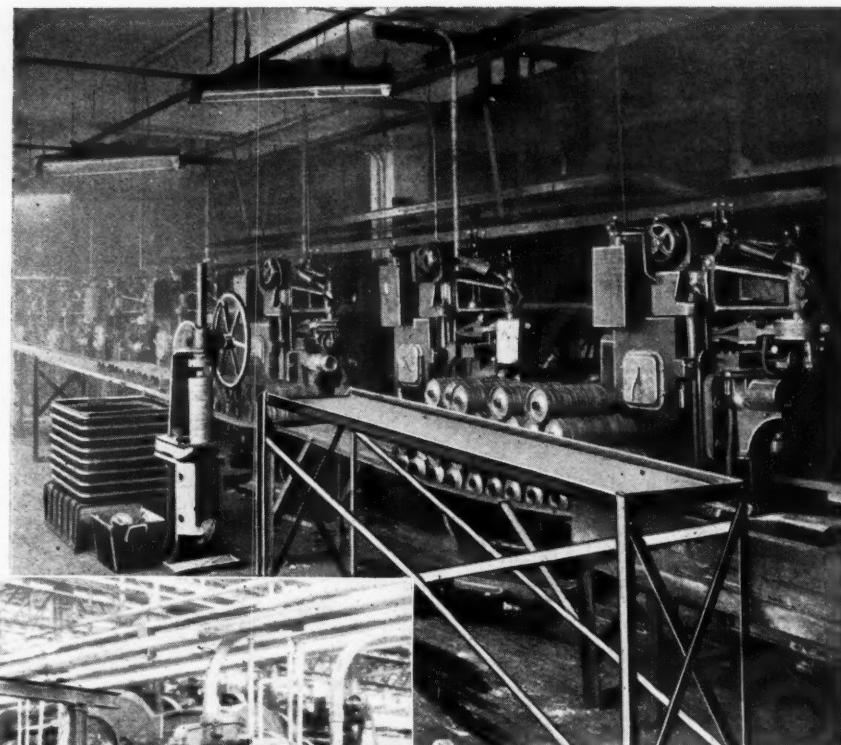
(left)—Welding of pressed steel fuel tank in Ford plant
